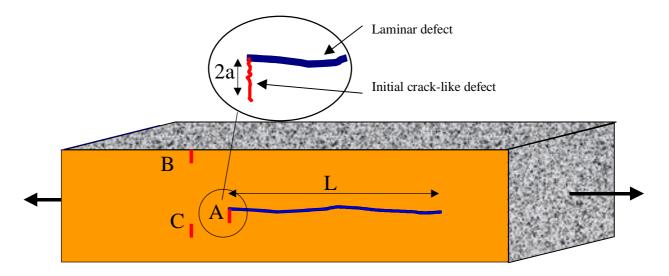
Idealised geometry of component containing three configurations of initial fatigue crack.
